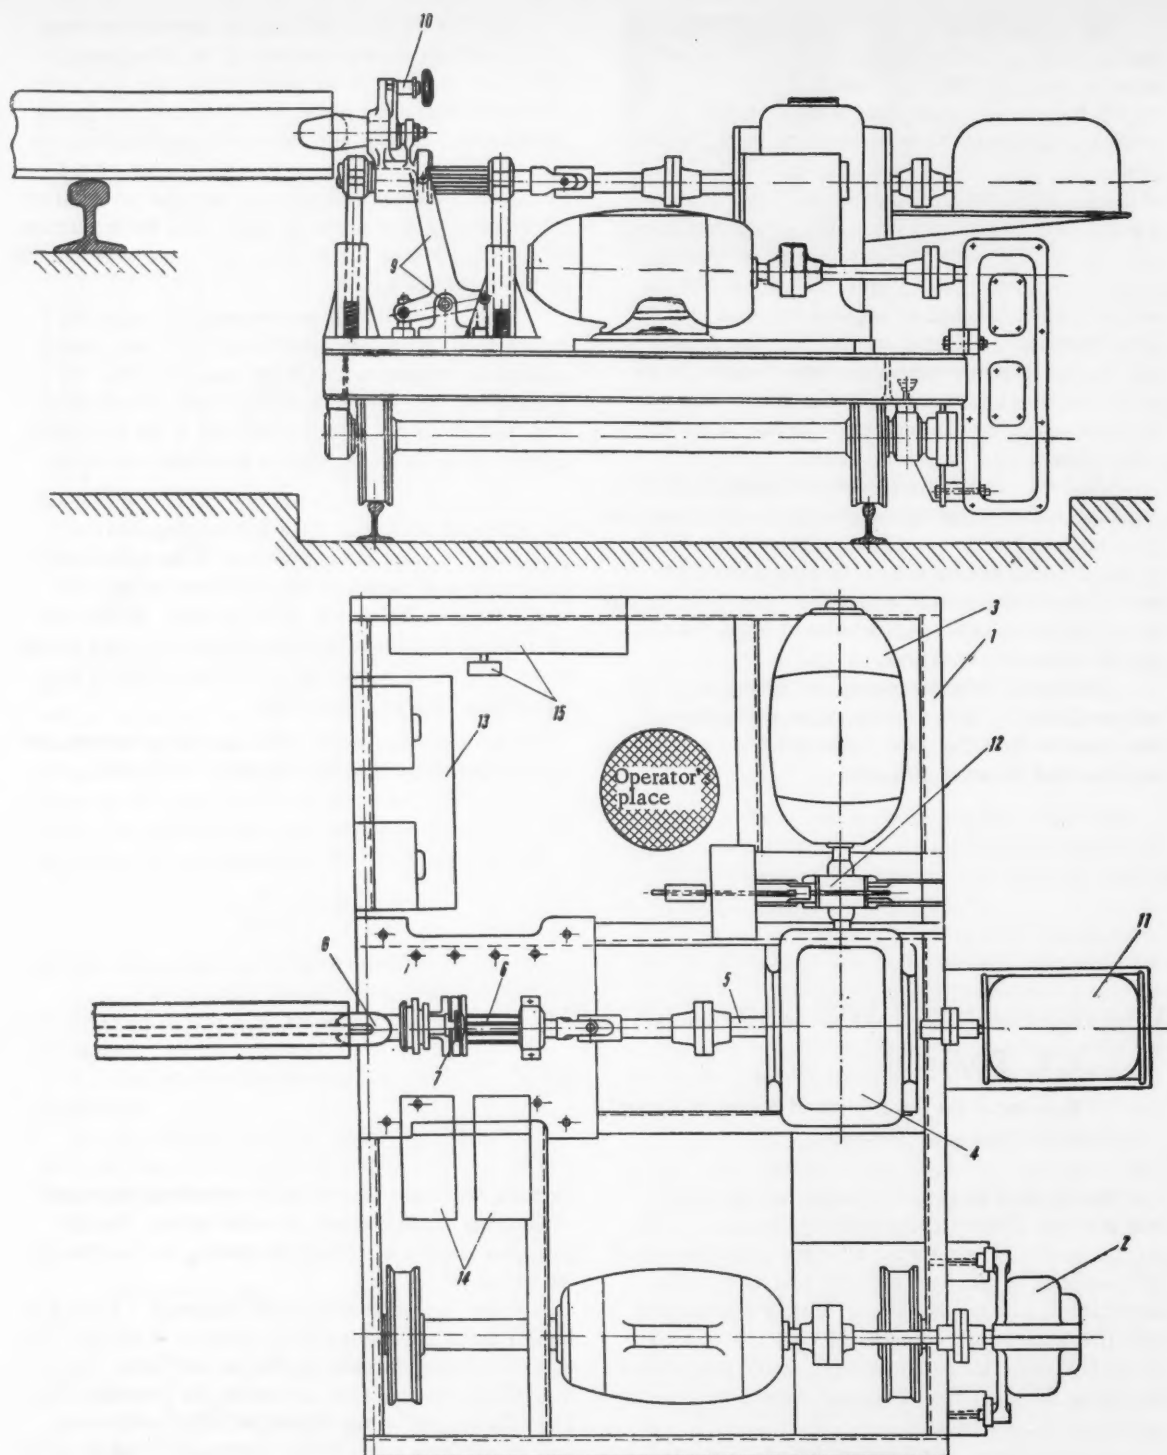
Diagram of the turning machine used at inspection beds: 1) Frame; 2) transmission gear; 3) 10 kw electric motor for driving the turning mechanism; 4) worm gear; 5) driving shaft of the turning apparatus; 6) grooved shaft; 7) segment; 8) fork for engaging the rail to be turned; 9) lever system; 10) arresting apparatus; 11) end switch (servomechanism); 12) brake mechanism; 13) control panel; 14) electromagnets; 15) commutator panel.
